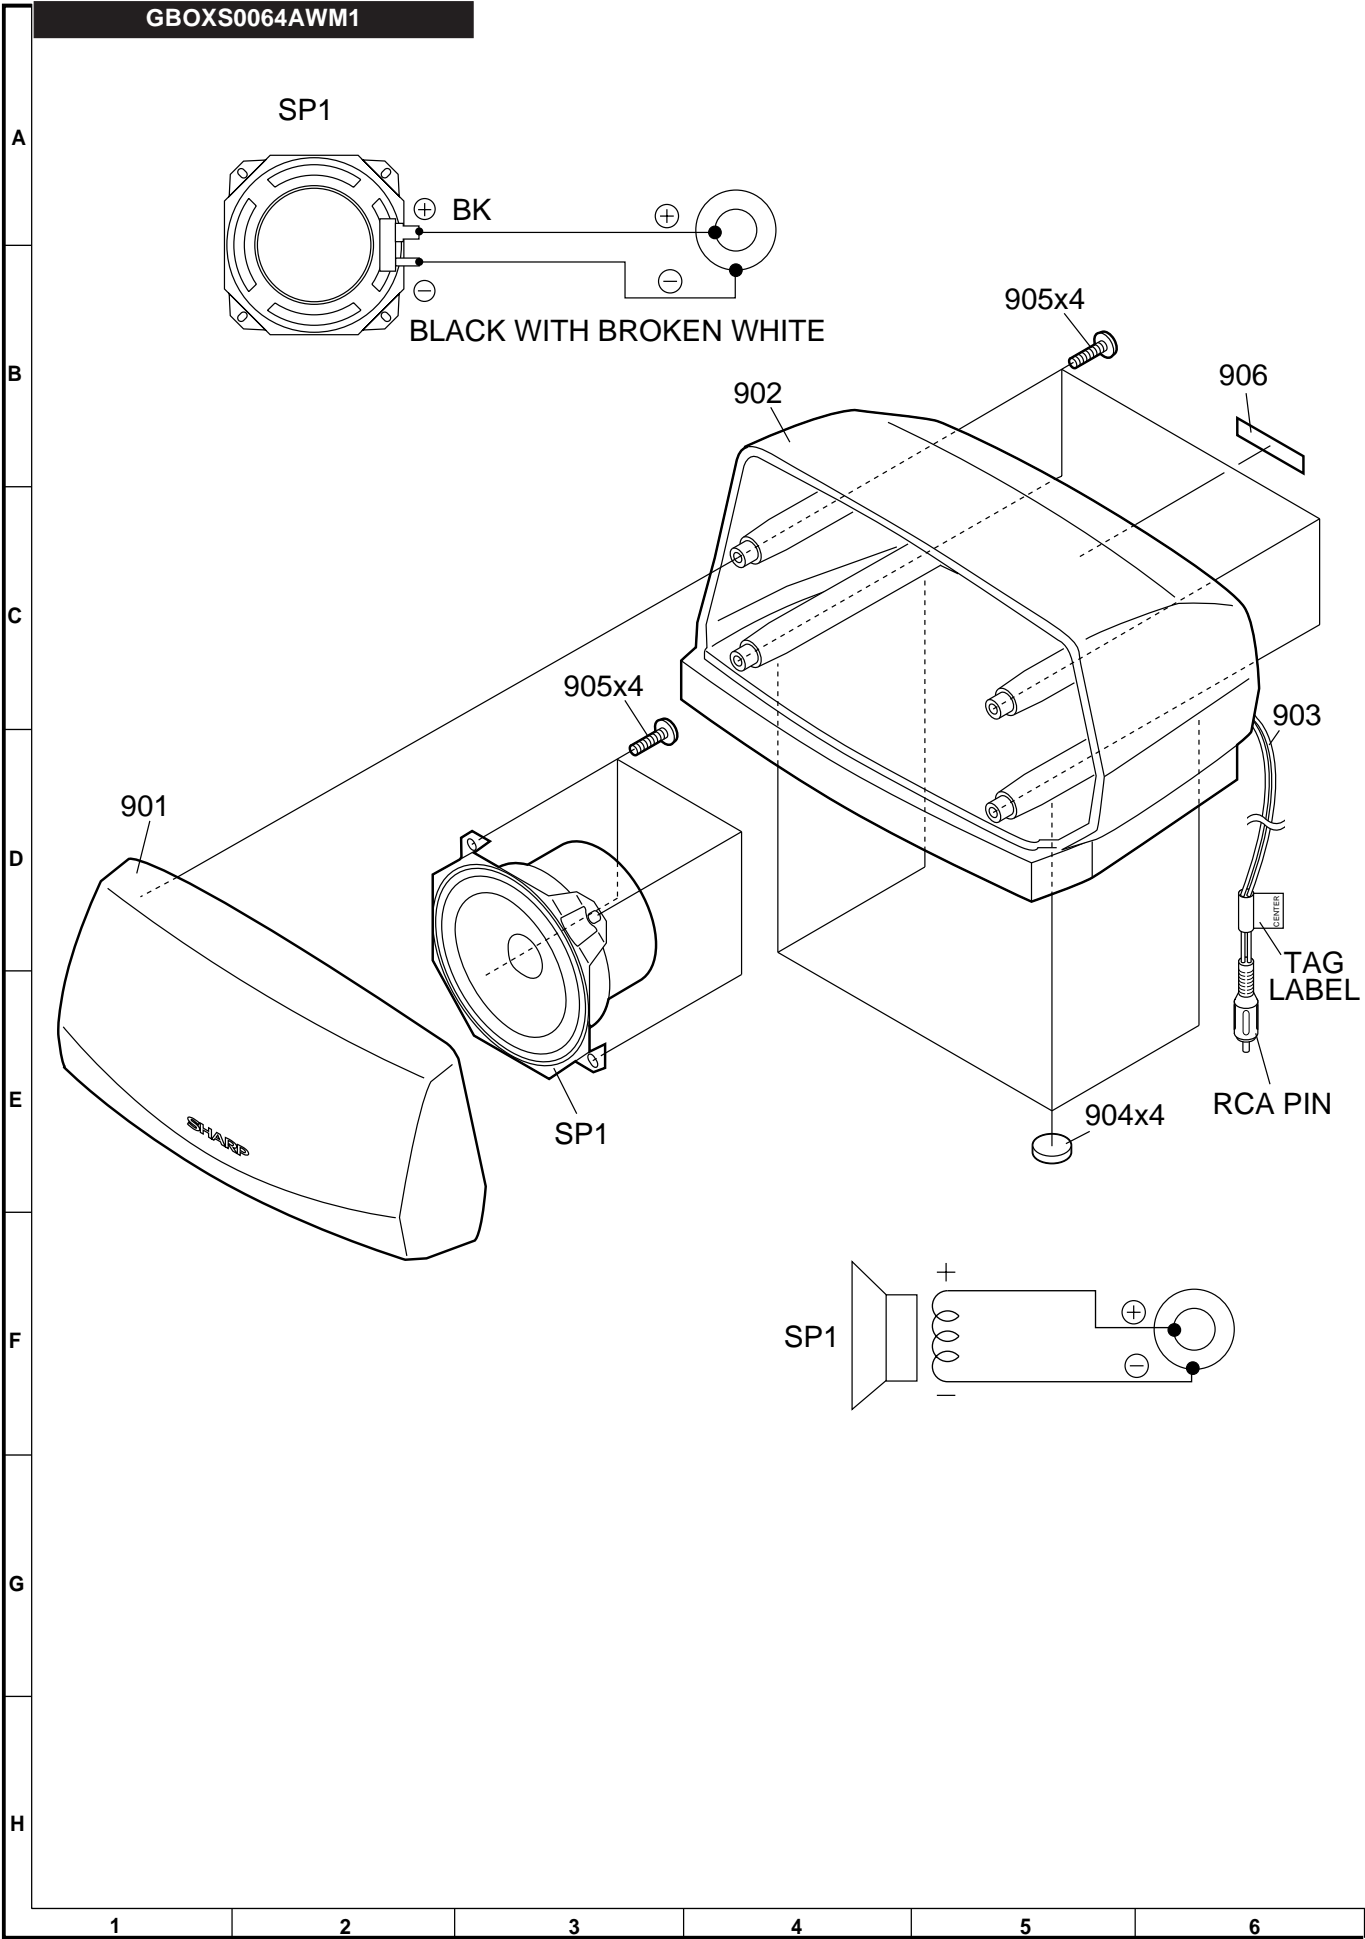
SPEAKER EXPLODED VIEW (2/3)
